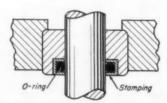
Machining a groove for an O-ring shaft seal is not necessary if the O-ring is installed in a stamped sheet-metal housing. This design has been used as an oil seal on drill press spindles.
